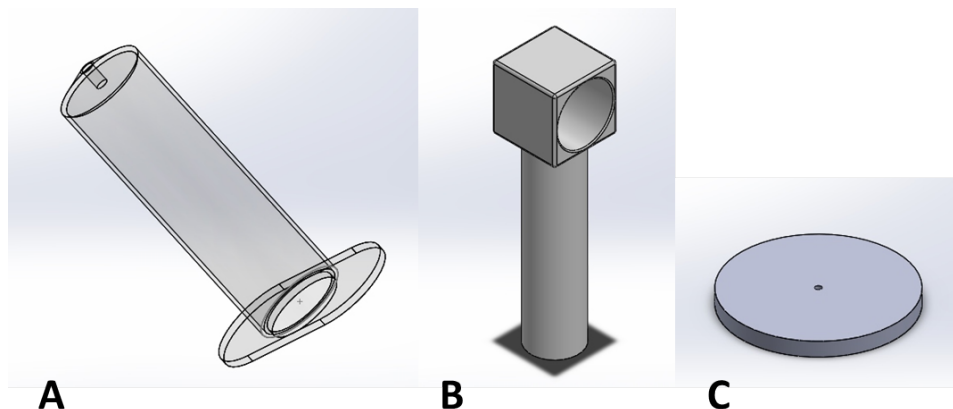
The Solidworks designs for the three 3-D printed components, (A) the outer body, (B) the plunger, (C) the chip.
